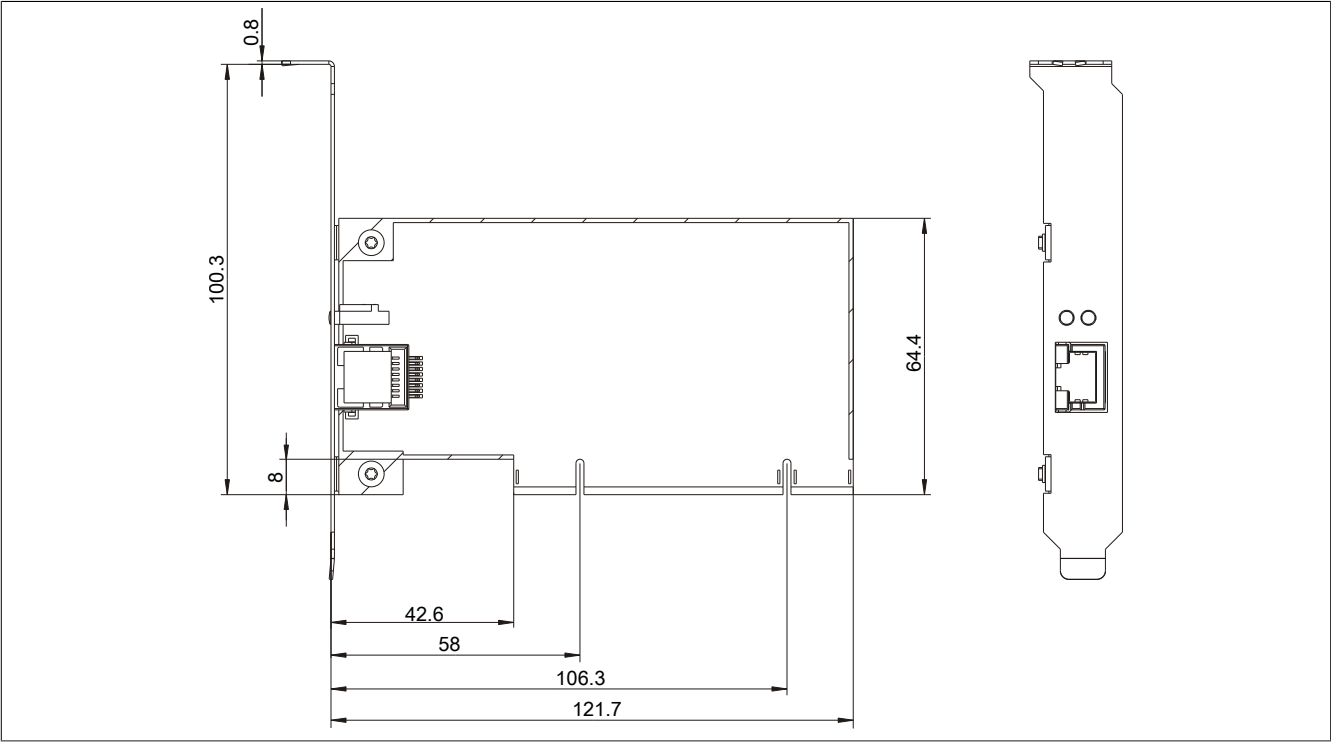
5ACPCI.ETH1-01 - Dimensions
